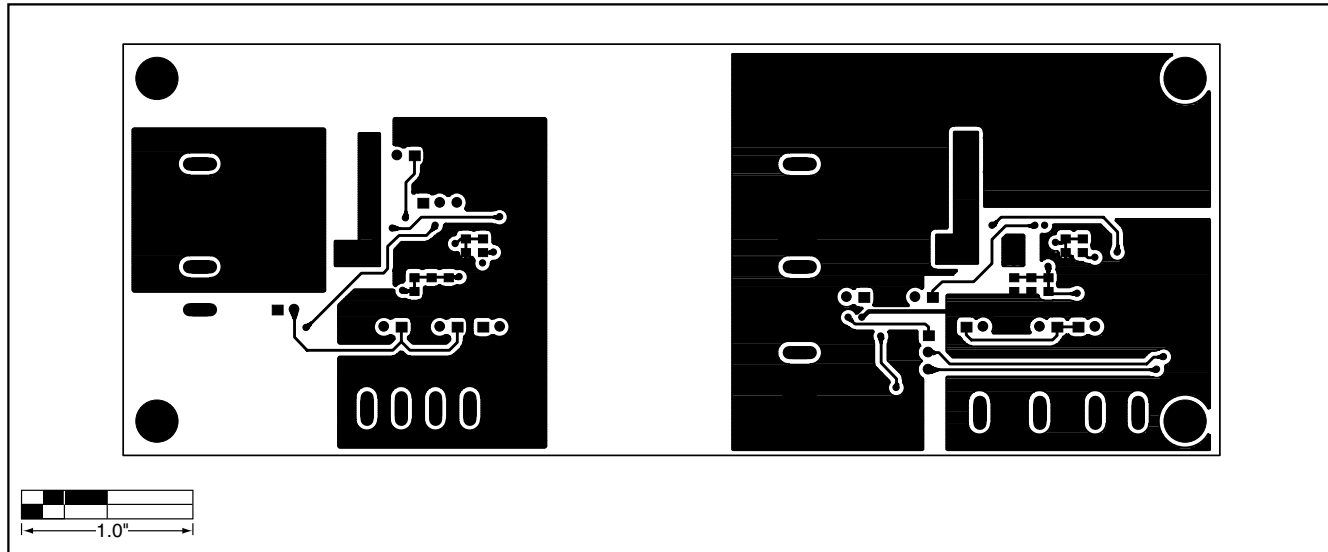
MAX1763 EV Kit PC Board Layout—Solder Side
